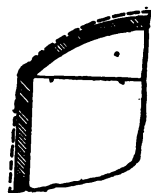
Convex head welded on cylinder with dotted lines to indicate the change of shape under the pressure strain.
